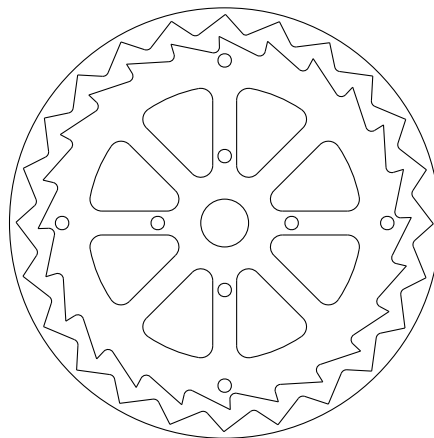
A 1:1-scale sketch of the final wheel design showing the groove used for drive and indexing.
